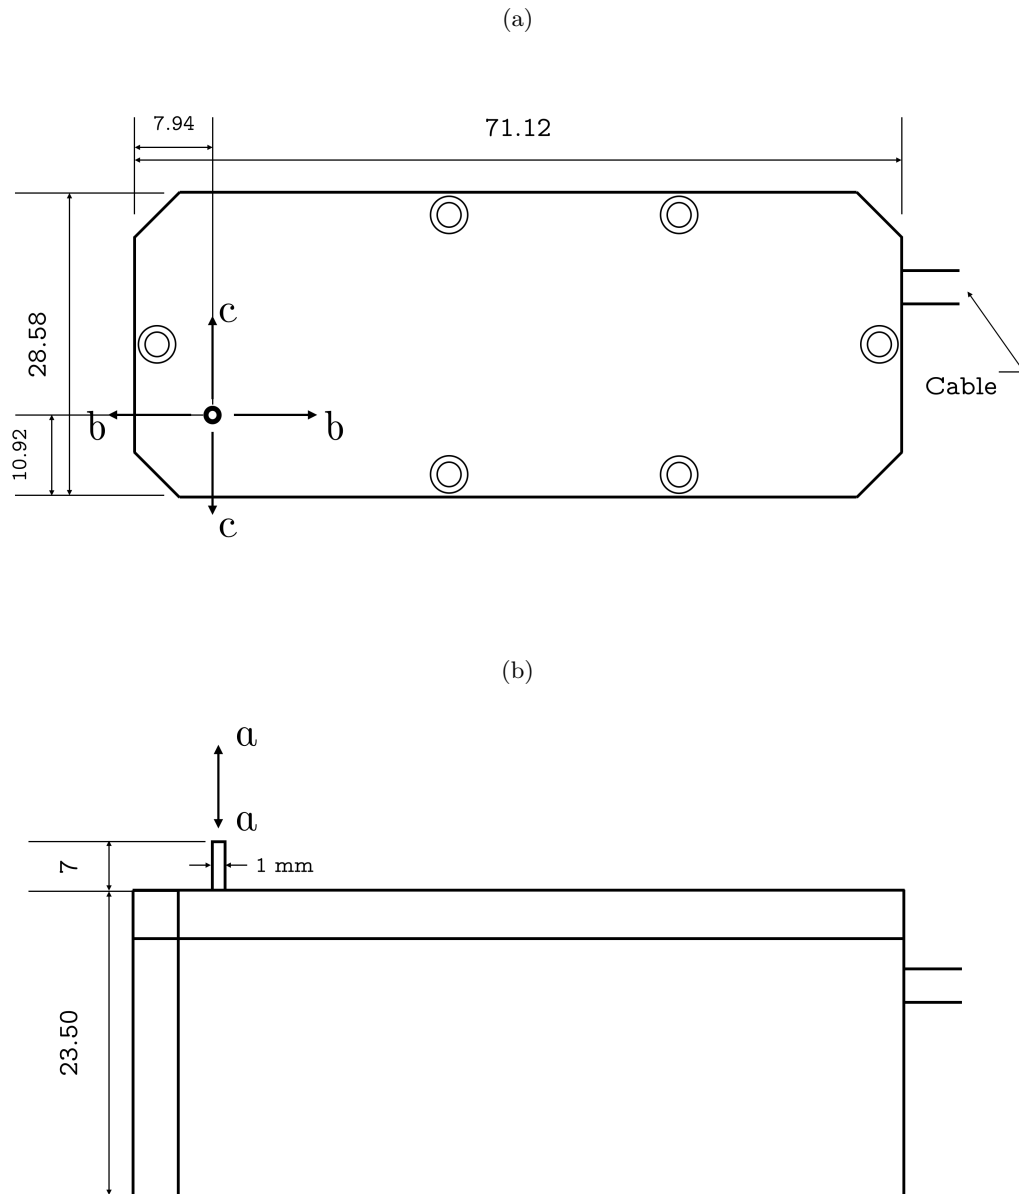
Schematic view of force transducer. (a) top view; (b) side view. Length in unit mm.
